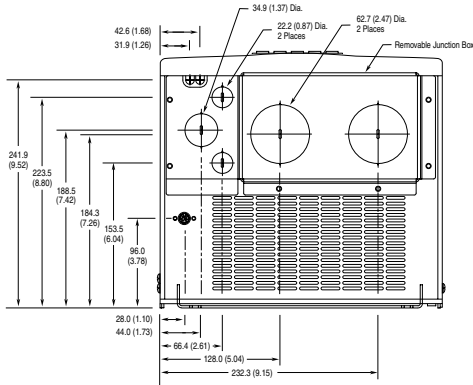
PowerFlex 700 Bottom View Dimensions (continued)
